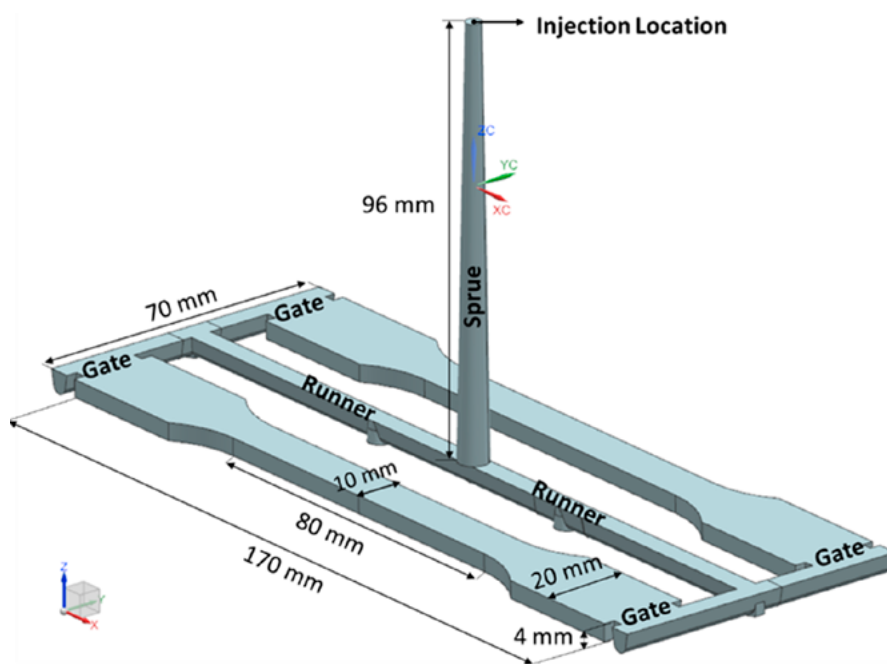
Details of the mold cavity used for producing dog-bone-shaped samples.
